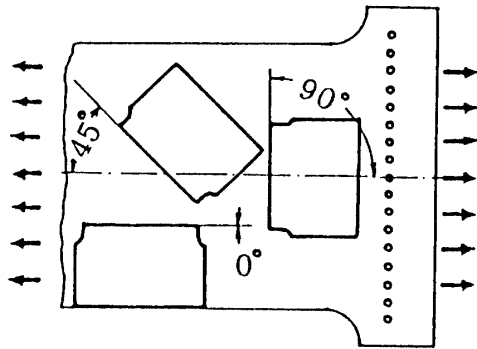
Cutting Plan of Workpiece hardened by pure Tensile Strain
